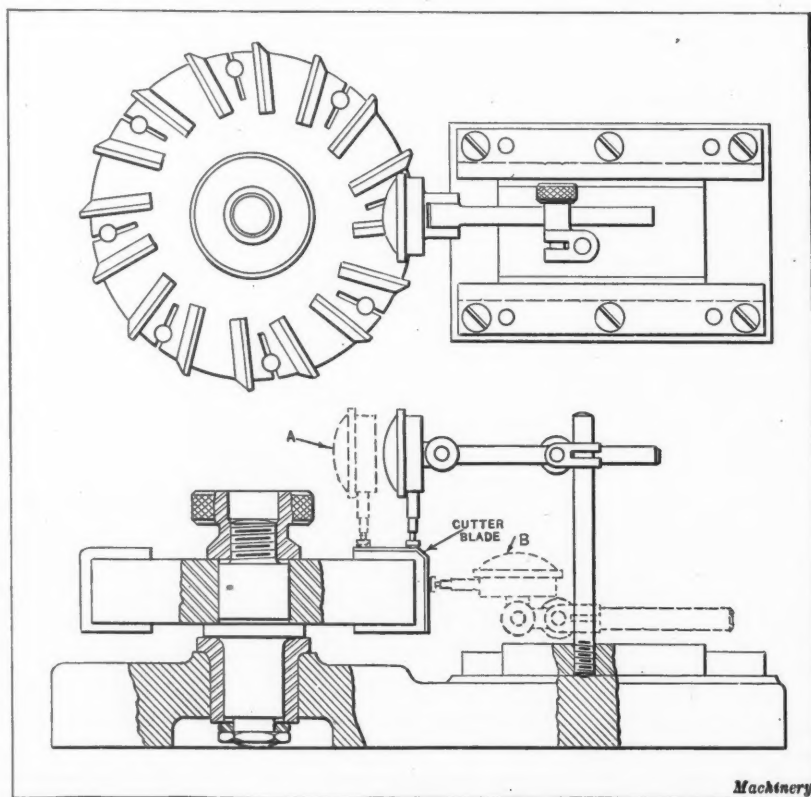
Cutter-testing Fixture with Adjustable Post for Indicator
